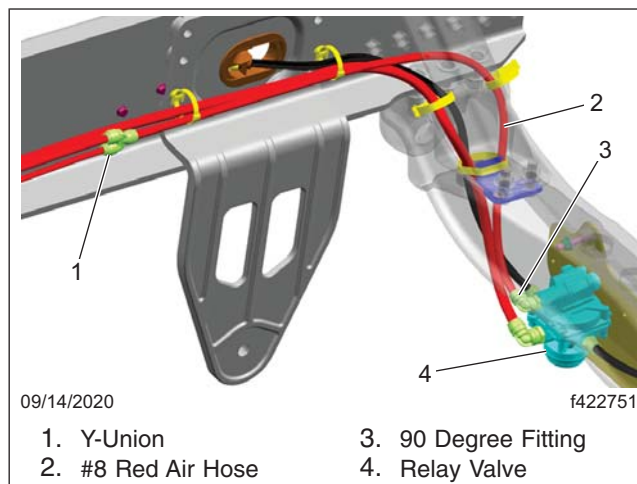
, Disconnecting and Removing the #8 Red Air Hose
